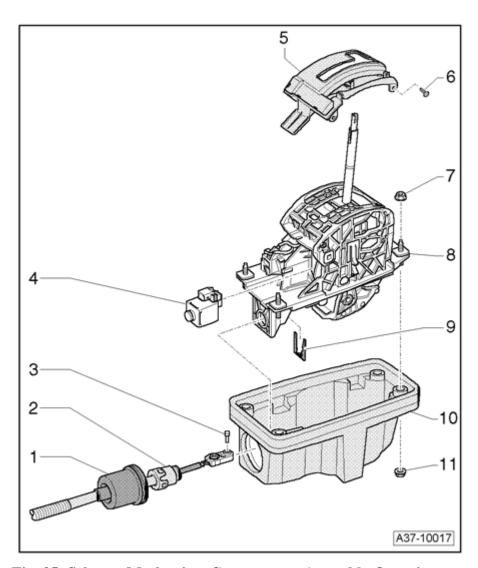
Selector Mechanism Components, Assembly Overview Courtesy of VOLKSWAGEN UNITED STATES, INC.
